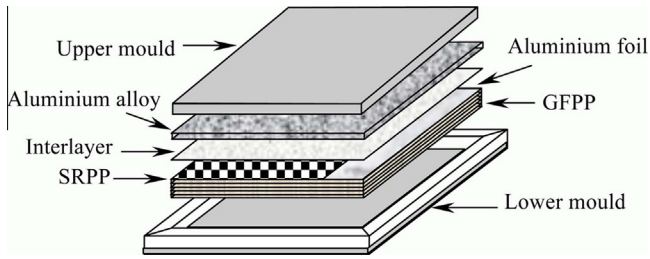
The stacking arrangement of the aluminium and composite sheets in the picture frame mould.
